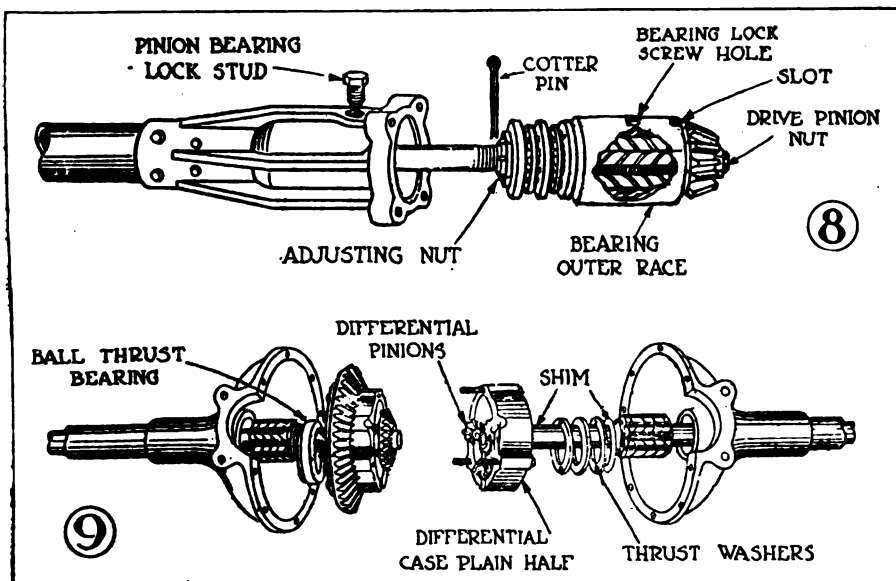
Removing the propeller shaft. Fig. 9—Removing the differential
